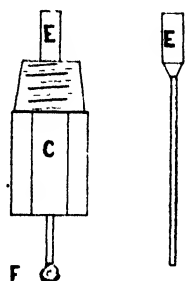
Brass nipple. (C) Octagonal casting $\frac{3}{4}$ in. by $\frac{3}{4}$ in. threaded at one end. (E) Valve and stem. (F) Droplet of water.
